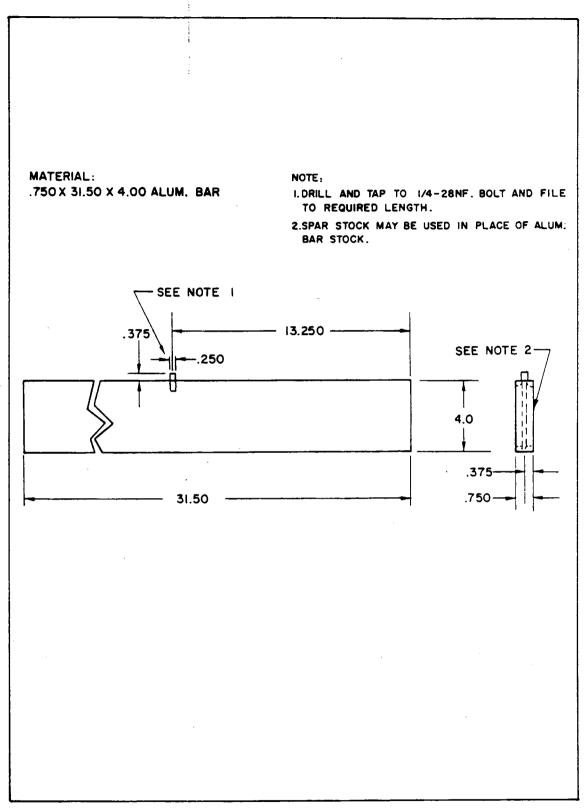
Fabricated Aileron and Flap Rigging Tool
